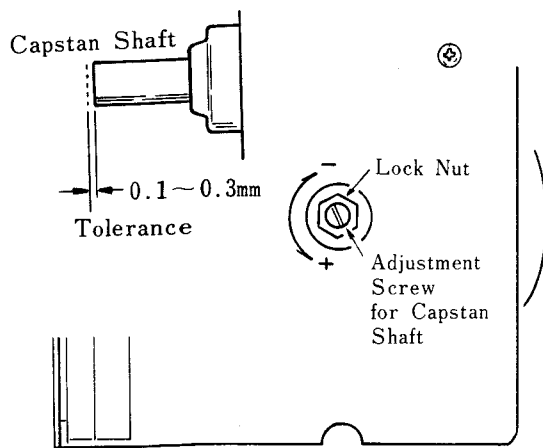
Shaft Tolerance Adj. Location
